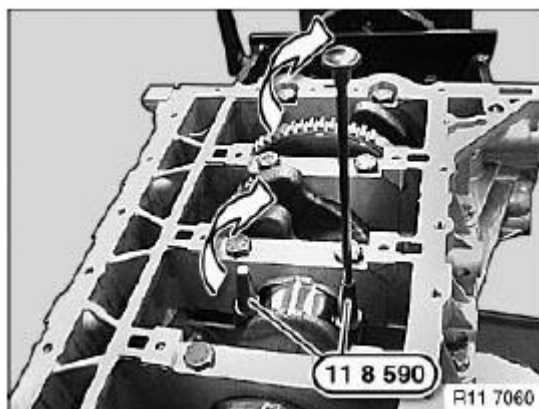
Screwing Special Tool (11 8 590) Into Base Of Connecting Rod
